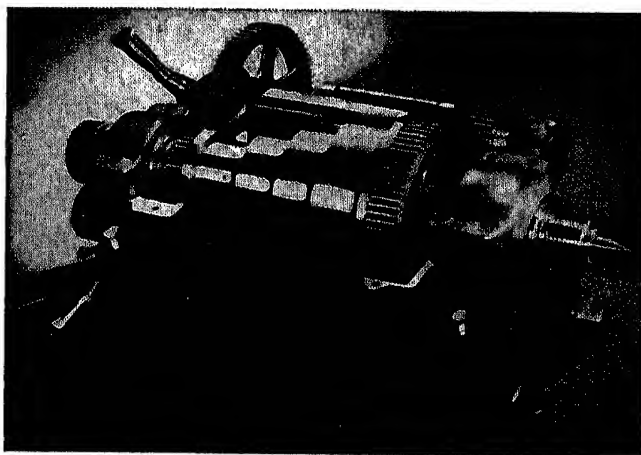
A back geared belt driven headstock with gear guards removed. (Courtesy South Bend Lathe Works.)
